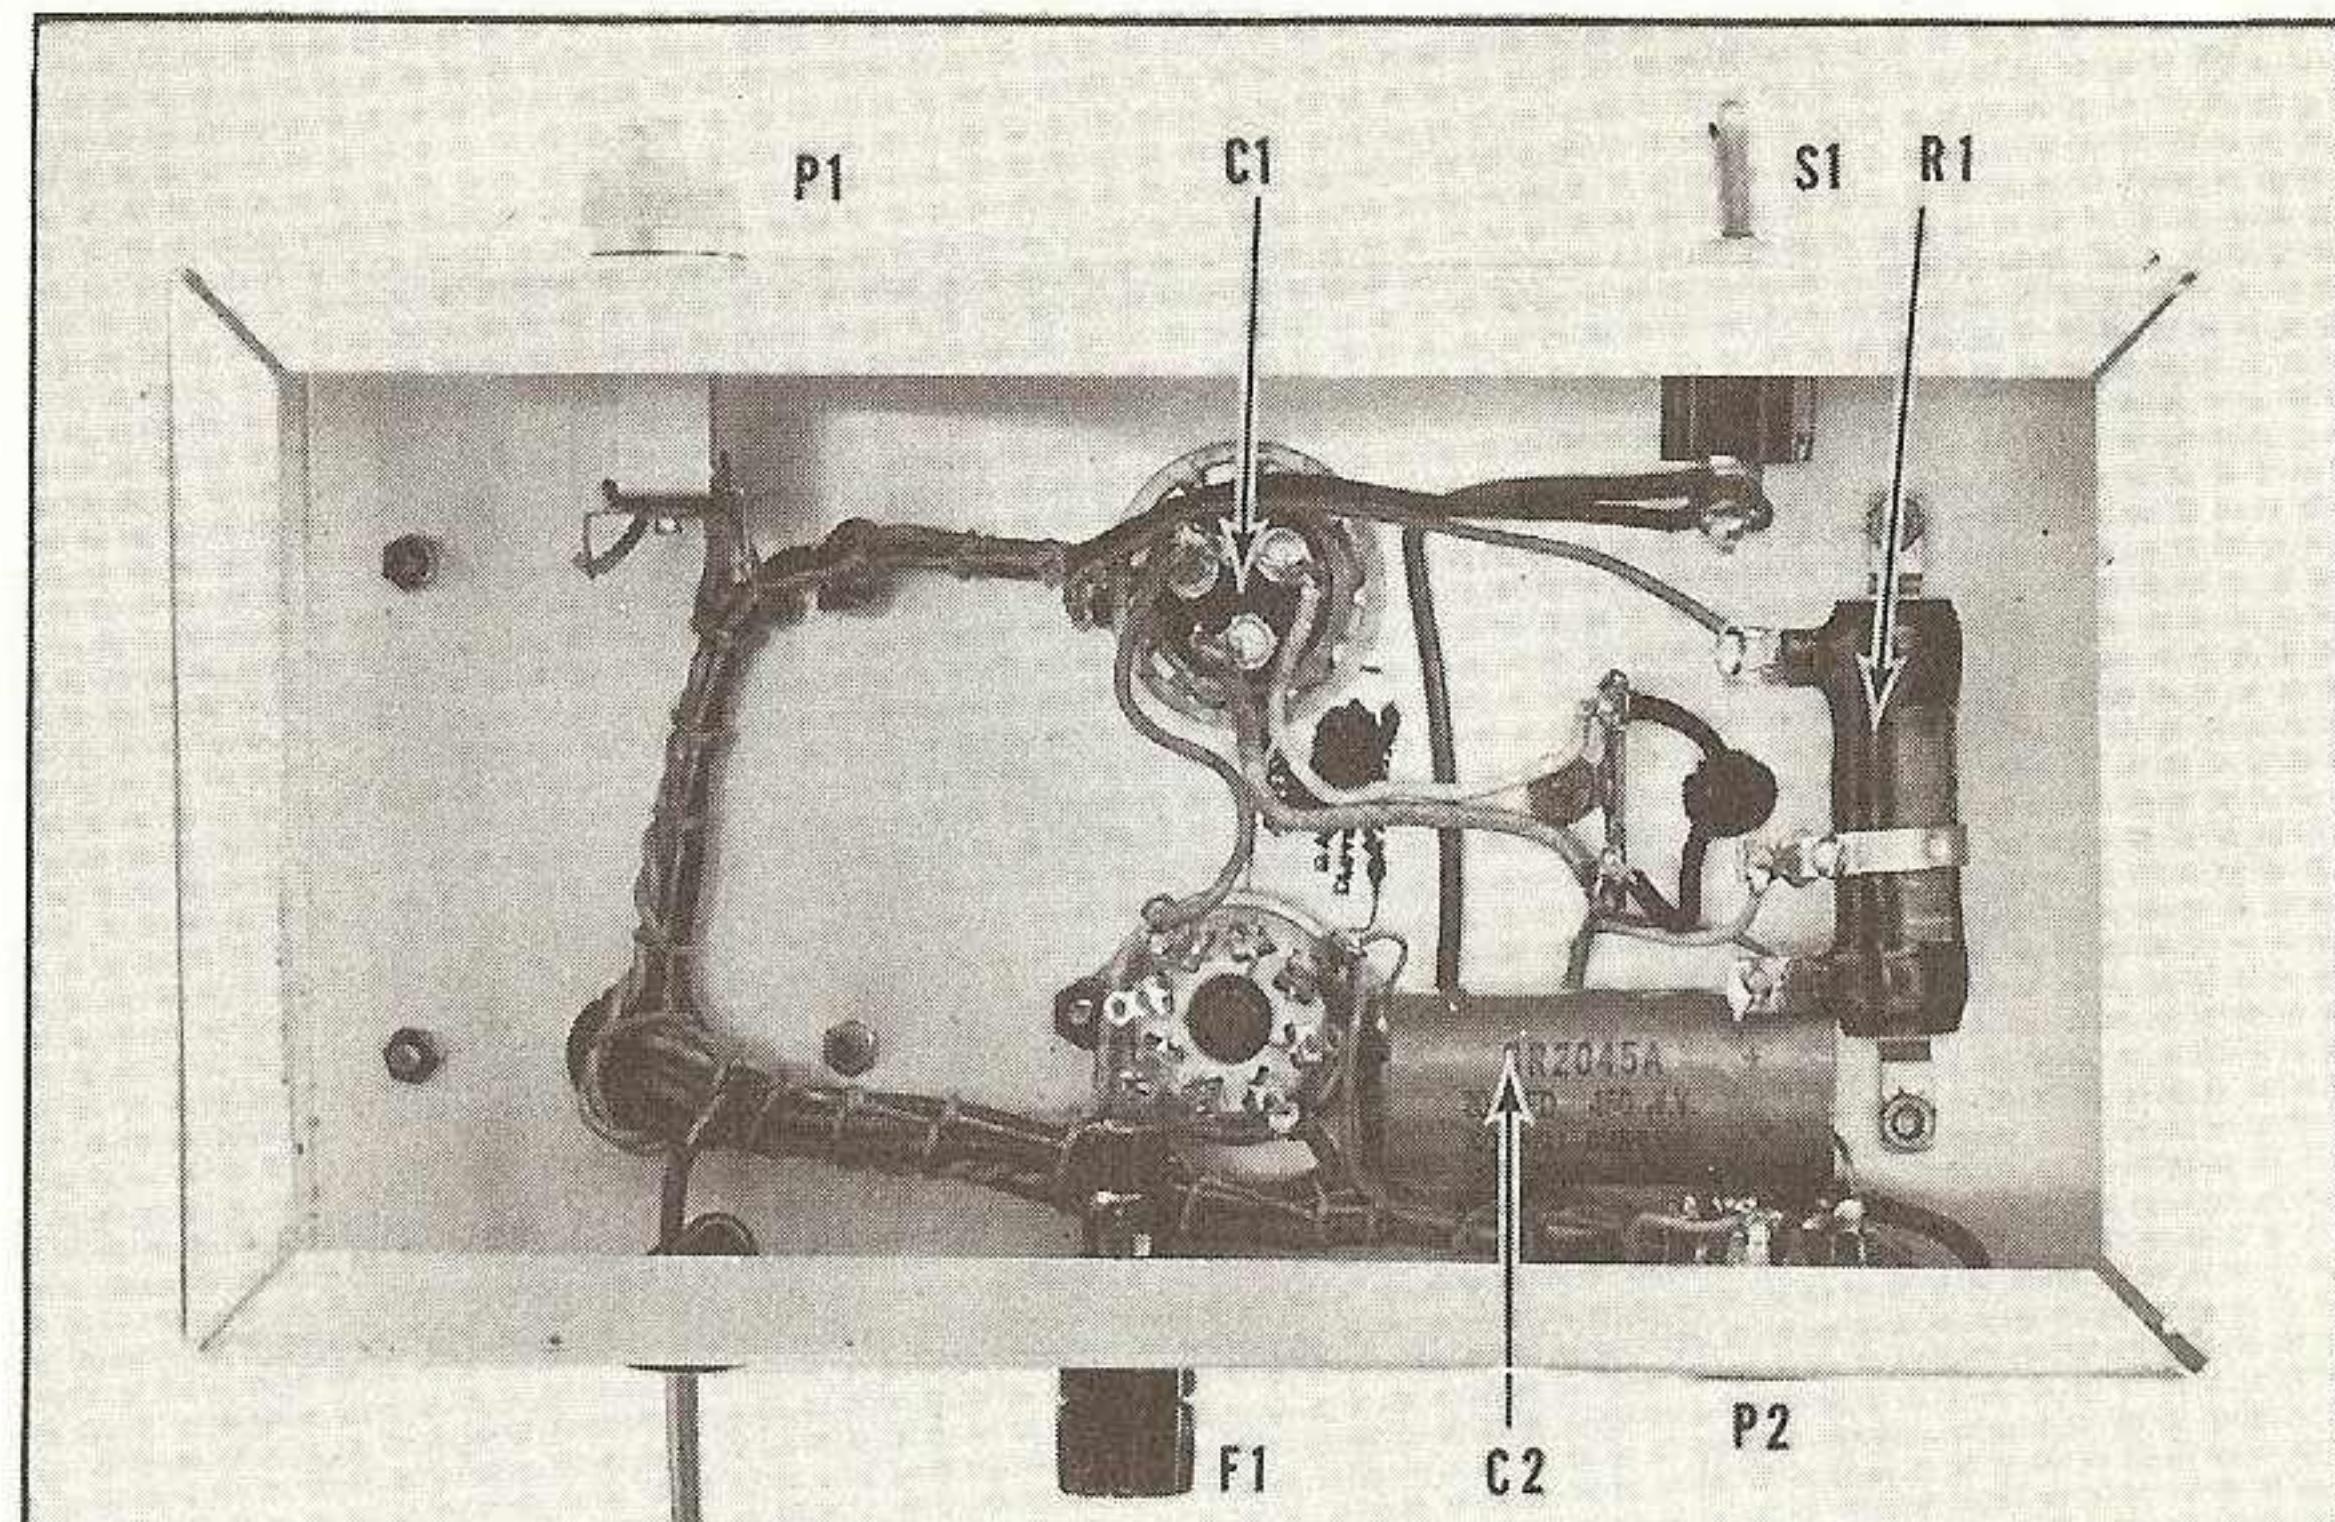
Under-chassis view of medium voltage supply, showing major components.
